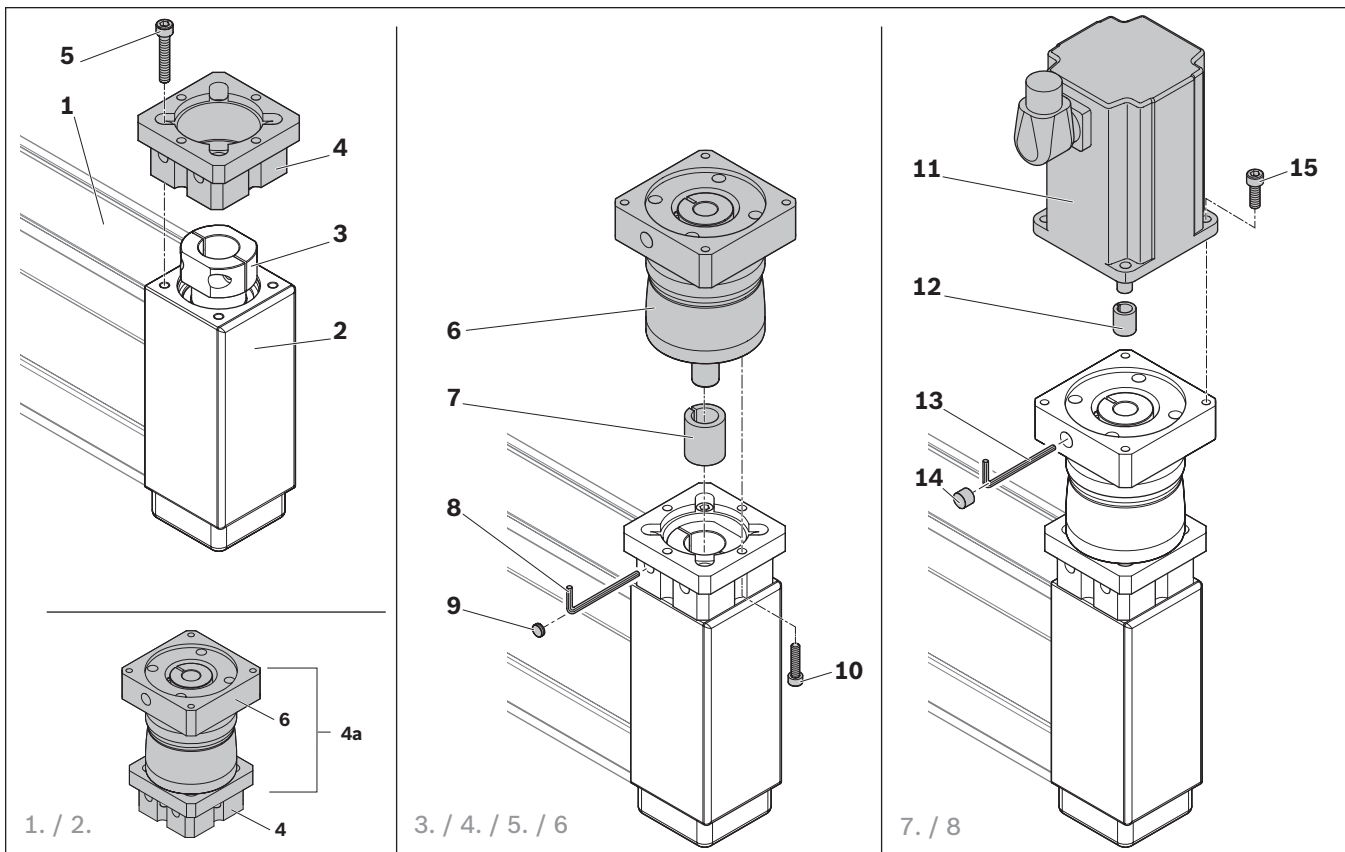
Gear attachment CKR-070/-090/-110/-145/-200 (PG090)
